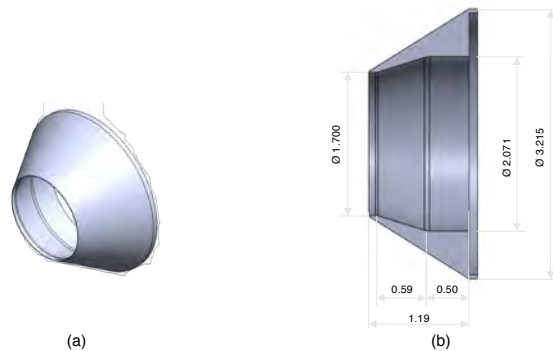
Exhaust nozzle (a) isometric view and (b) dimensioned cross section view (all dimensions are in inches)
